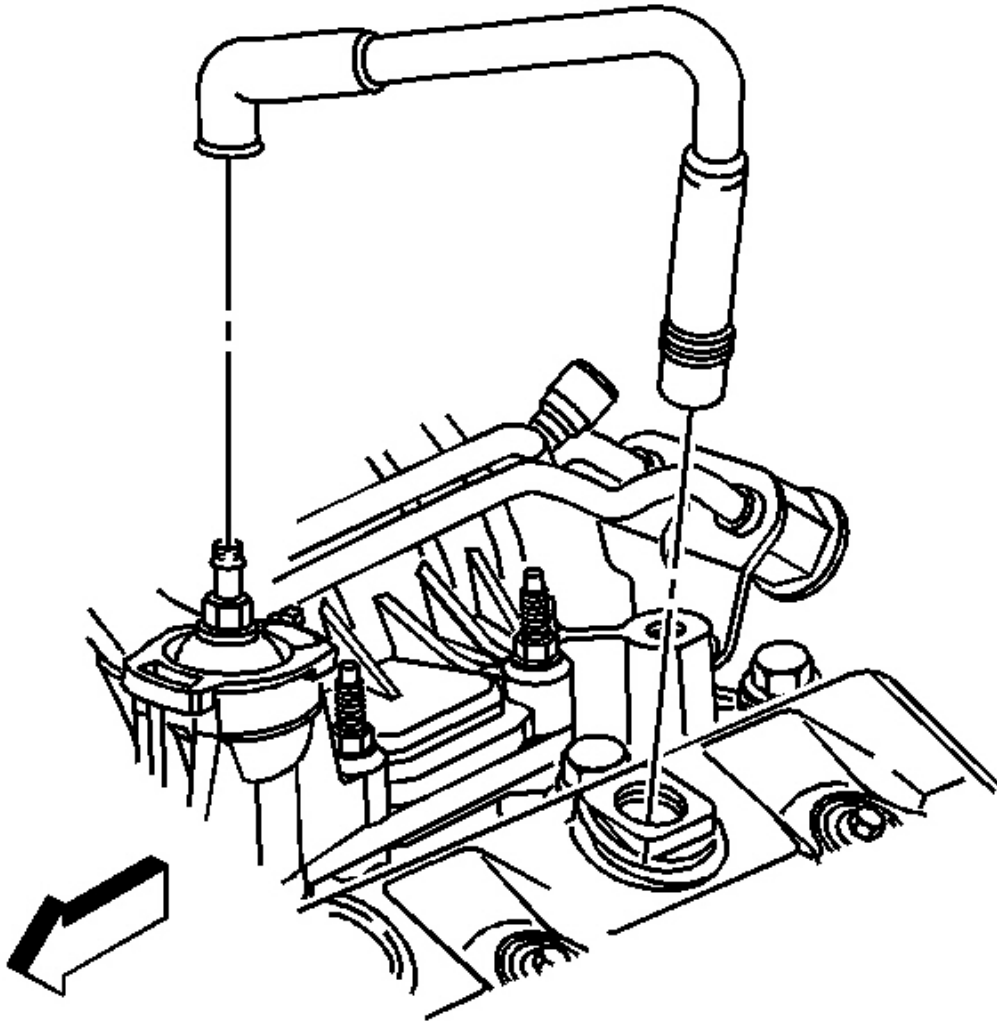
Locating PCV Valve Hose At Valve & Rocker Cover
